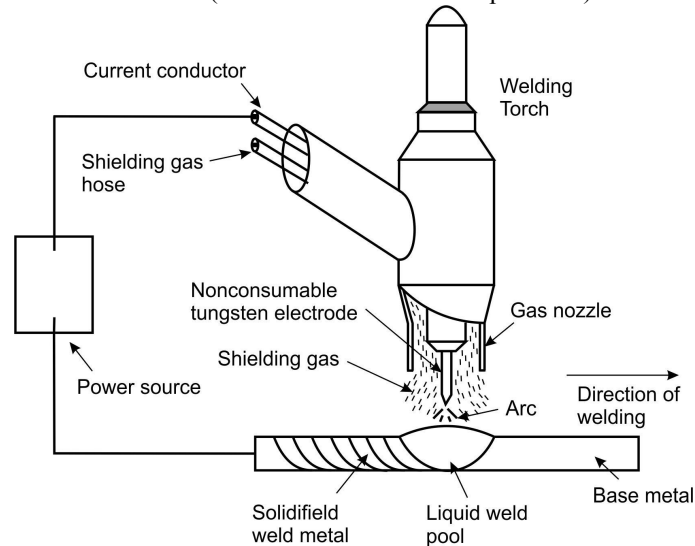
Schematic representation of GTAW (TIG) welding ^[8]
